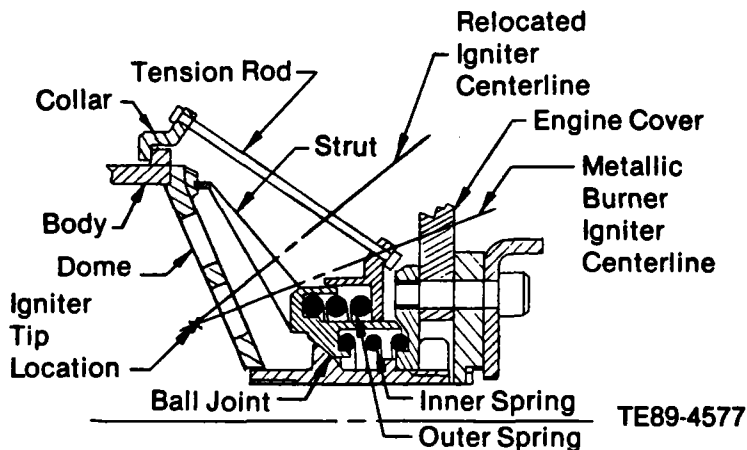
Ceramic combustor attachment mechanism (cross-section).
